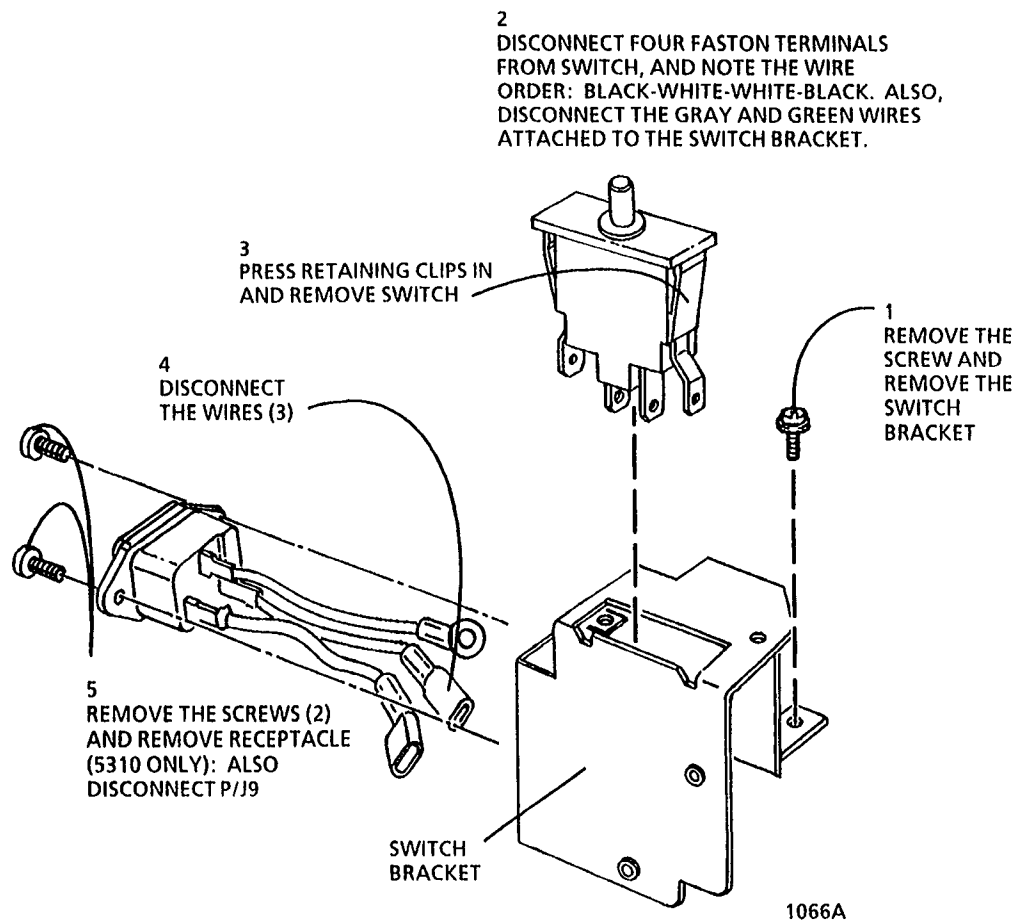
Removing the Power On-Off Switch/Interlock or the Power Receptacle
